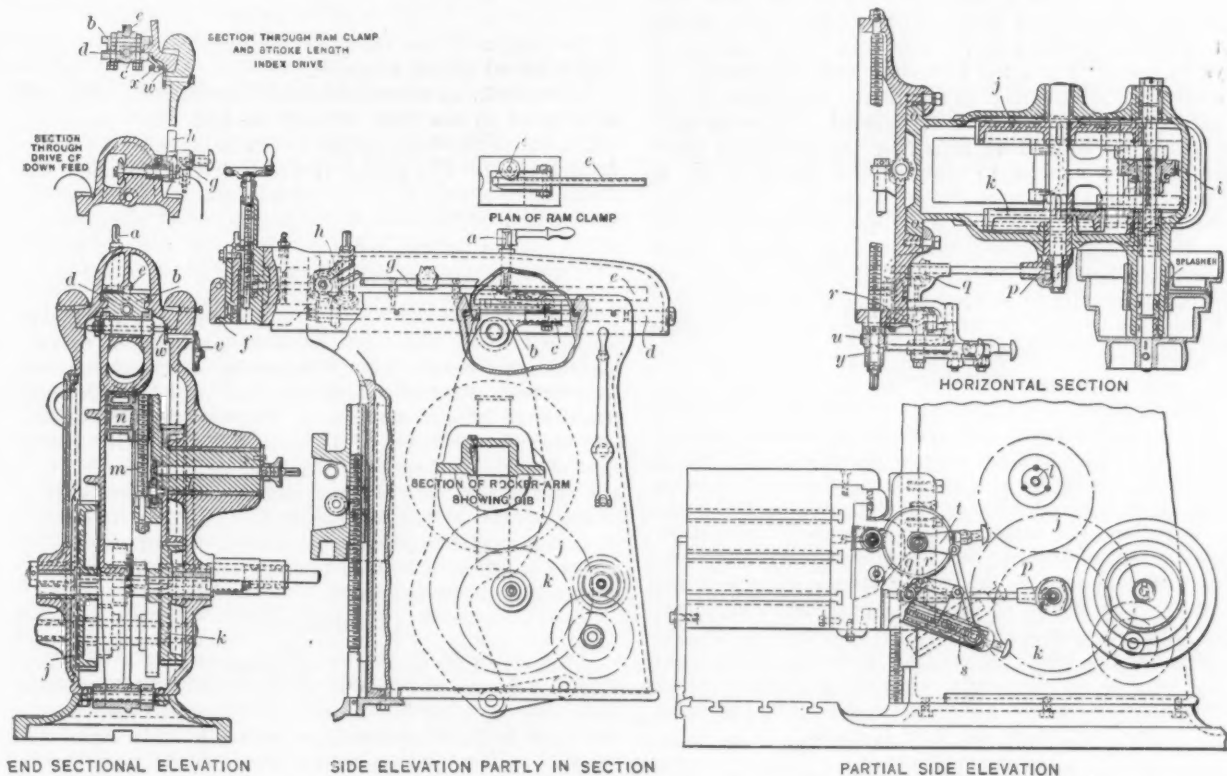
Constructional Details of the New Walcott & Wood Shaper.
